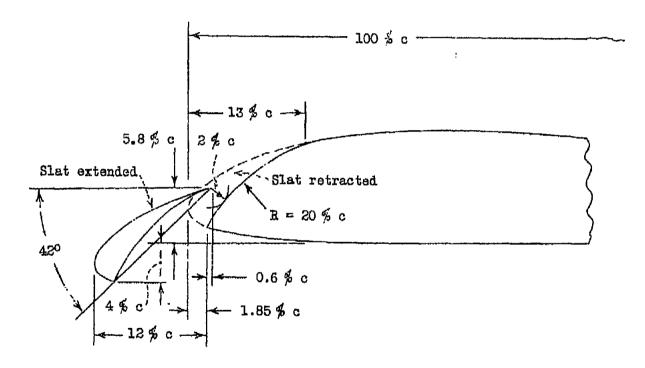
Section showing dimensions of Handley Page slot on leading edge of Fowler wing.
